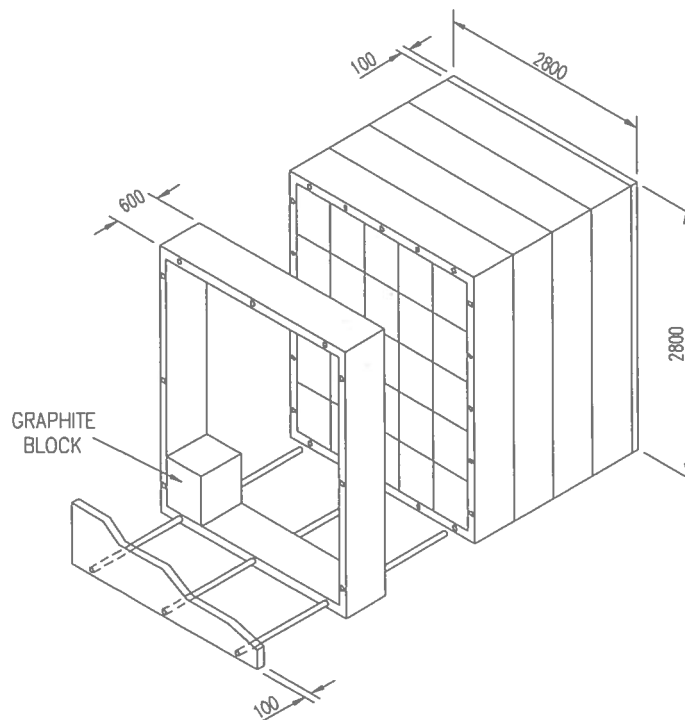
Schematic view of a possible assembly of the graphite inserts (dimensions in millimetres)
